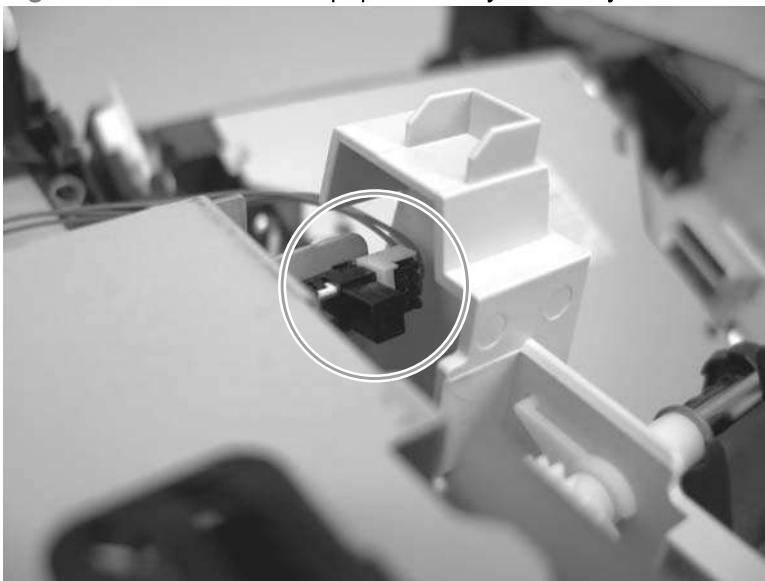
Remove the paper-delivery assembly (4 of 4)
